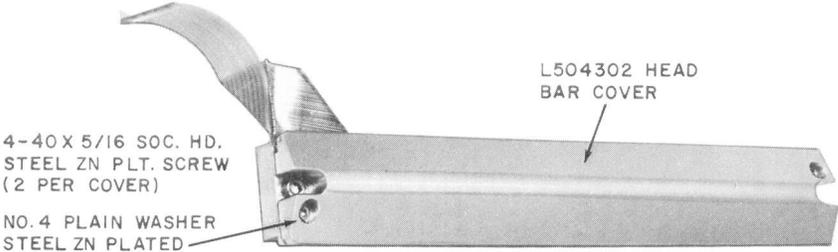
Head Bar Assembly Removed From Recorder Unit With Head Bar Cover Mounted
